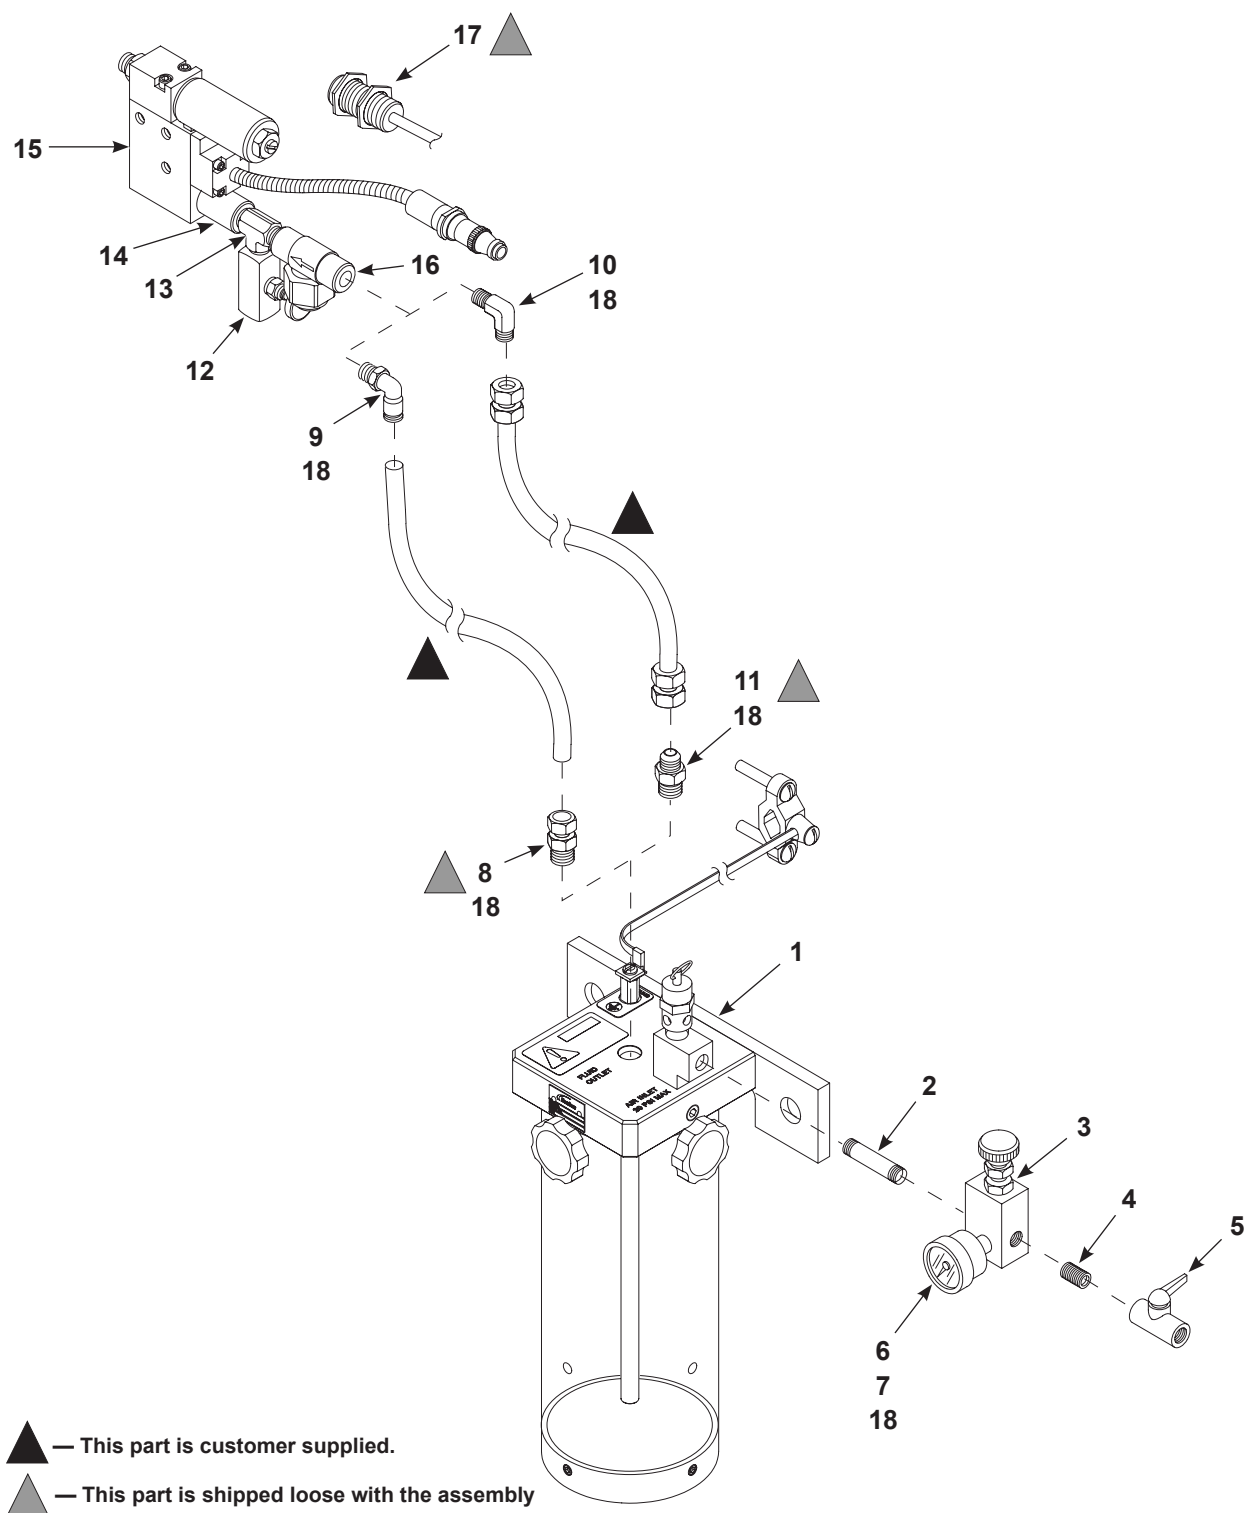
Ink-Dot Manifold Reservoir Hydraulic System Parts
